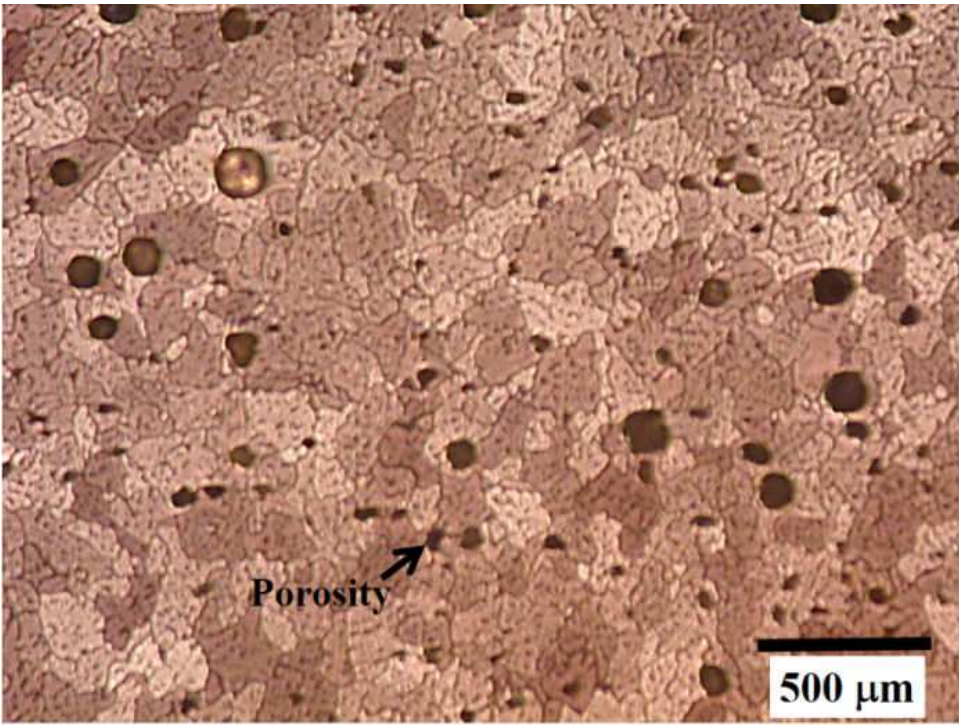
Weld pool porosity on a 6061-T6 aluminum alloy welded by GMAW.
